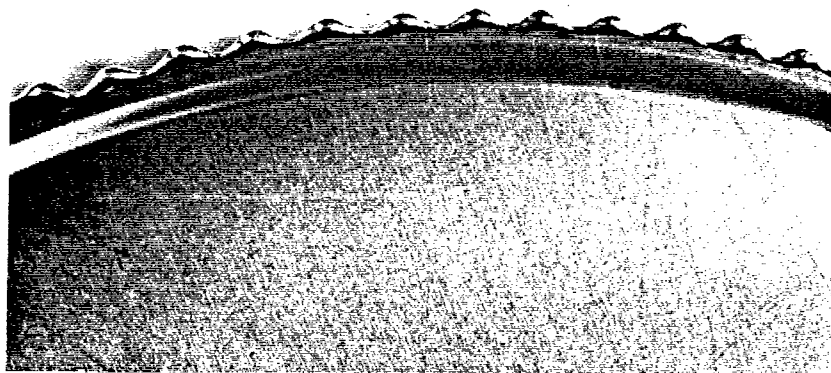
Unacceptable Edge, Weld-Irregular, Sawtooth Contour
